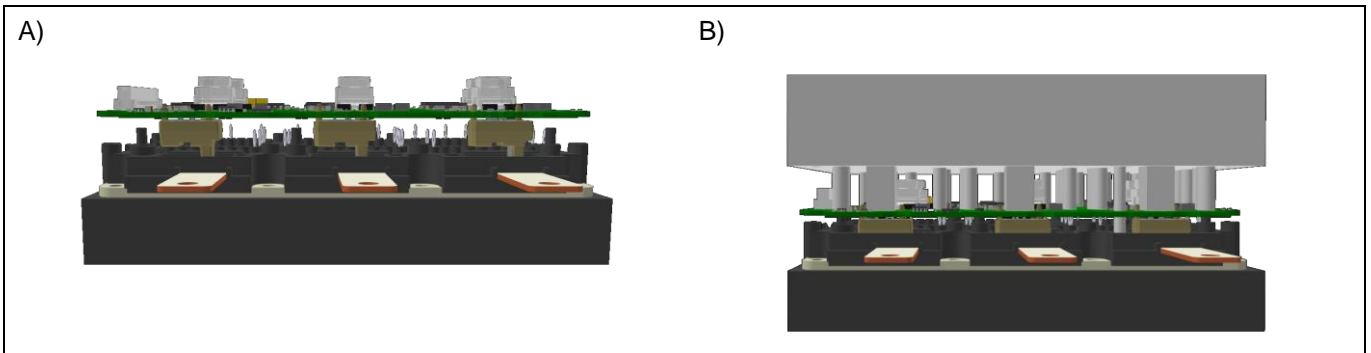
PCB with pre-assembled sensors pressed onto the module. The sensors will position automatically into their final correct positions due to the power module “rotation bar”.
